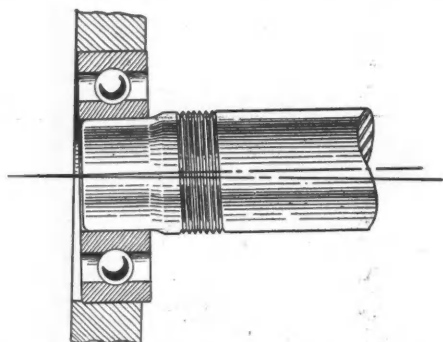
A driving fit of the pilot bearing into the recess often results in the bore of the bearing not being at right angles with the face of the flywheel. This causes the clutch to run out of alignment. The bearing should be a light tap fit into the recess.
